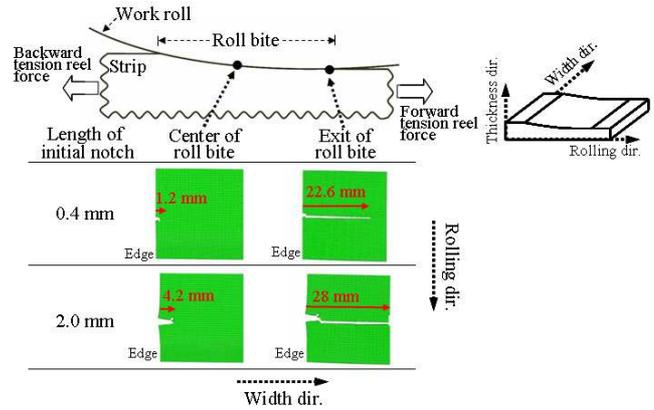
Edge fracture of electrical steel strip at roll bite during cold rolling when the forward tension reel force is 292kN
